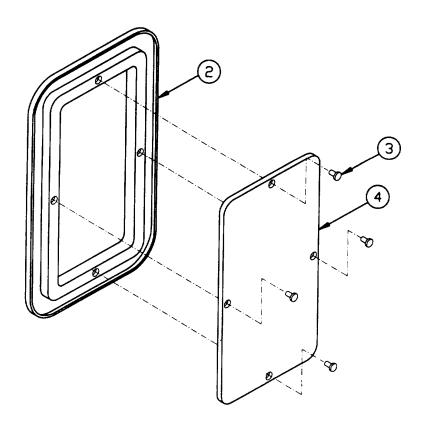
PANEL ASSEMBLY, ESCAPE HATCH
